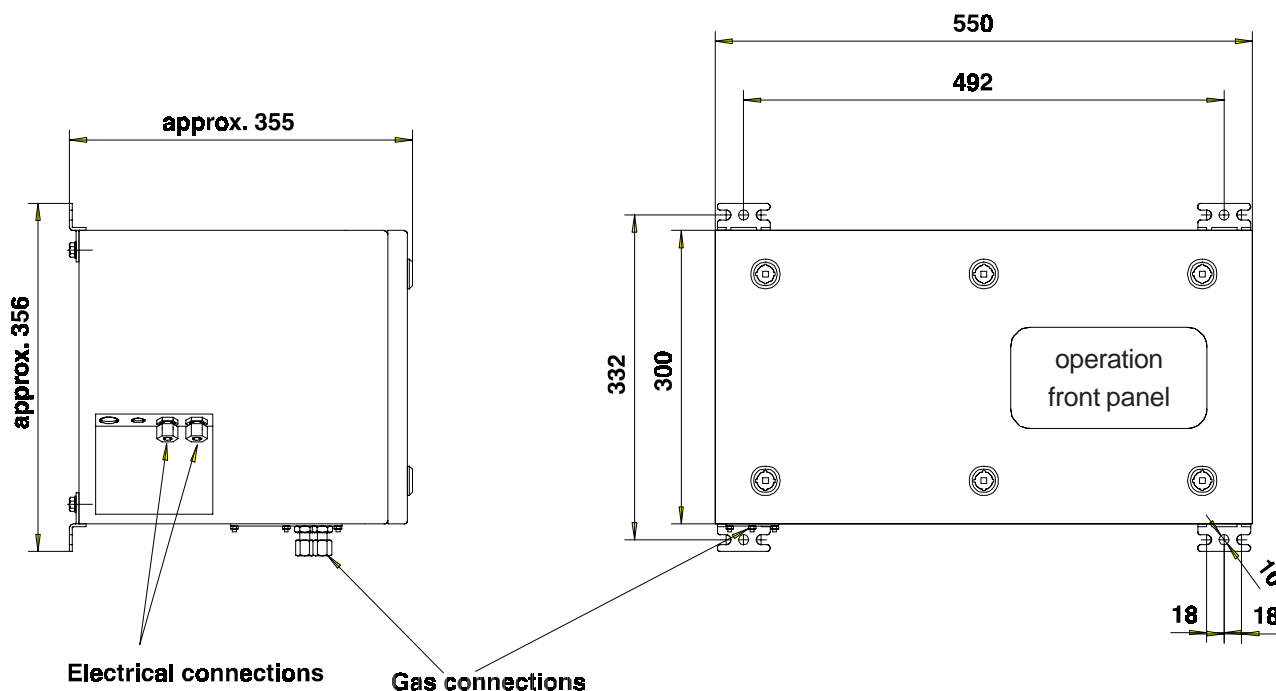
Dimensional sketch/ Drill drawing BINOS® 100 F (dimensions in mm)
